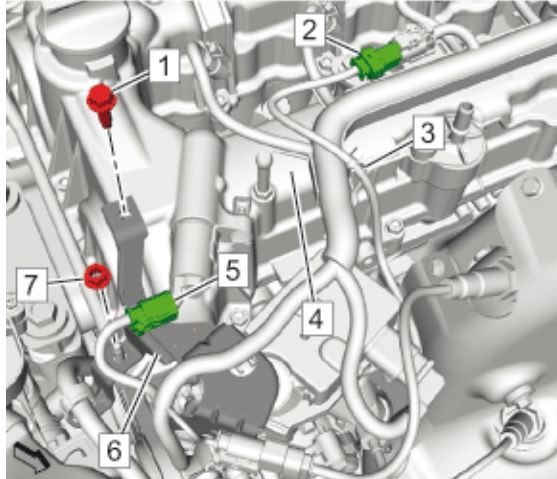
Bolt, Electrical Connectors, Retainer, Nut And Wiring Harness Bracket
